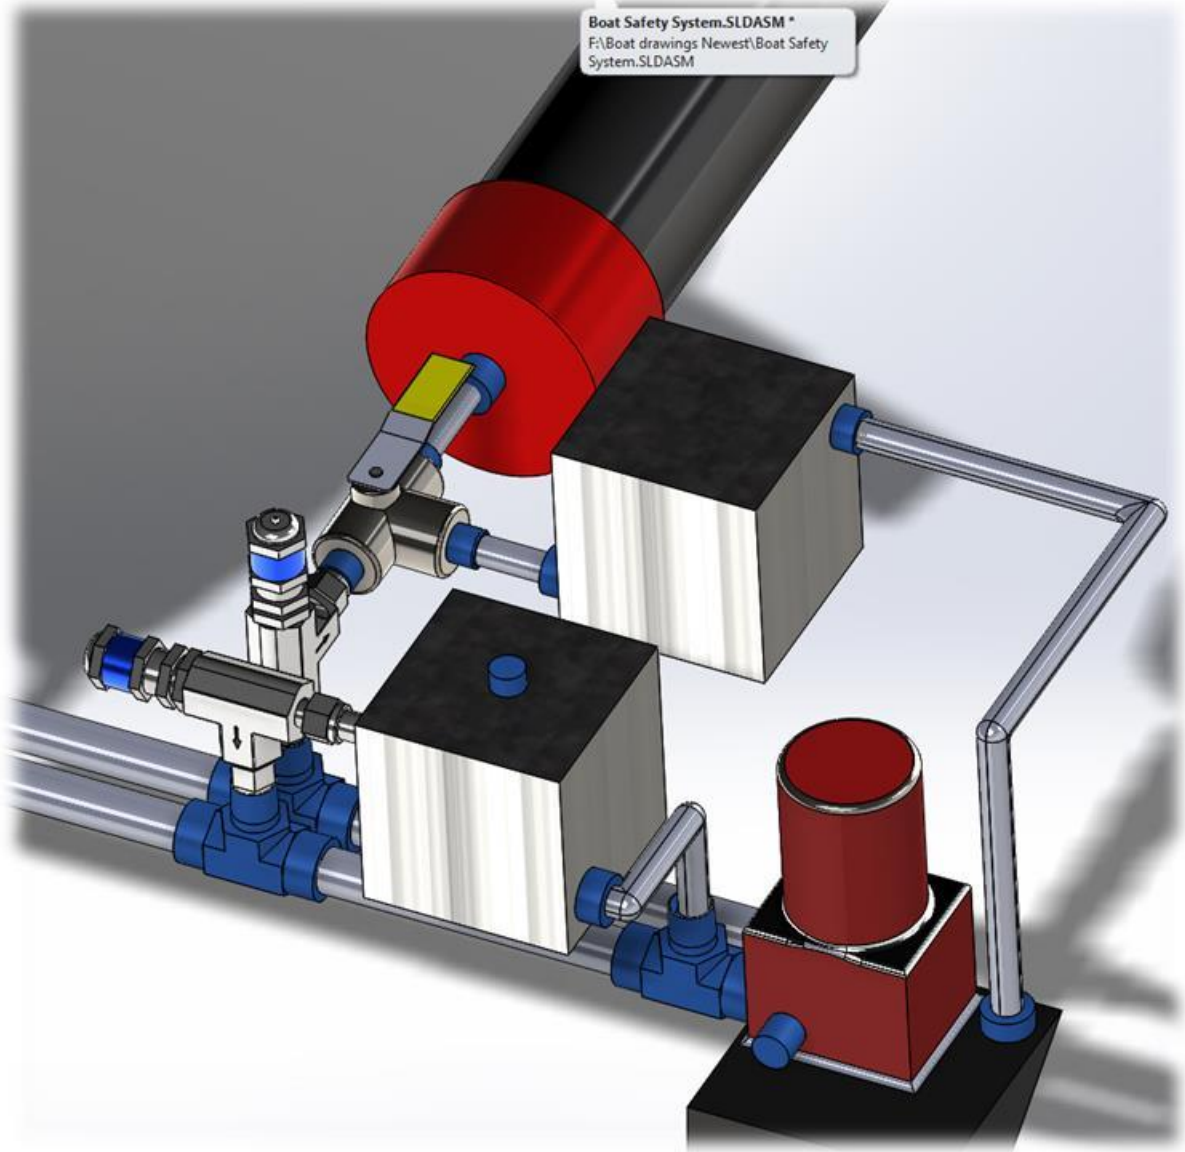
3D rendering showing complete system connected to boat hydraulic pump
